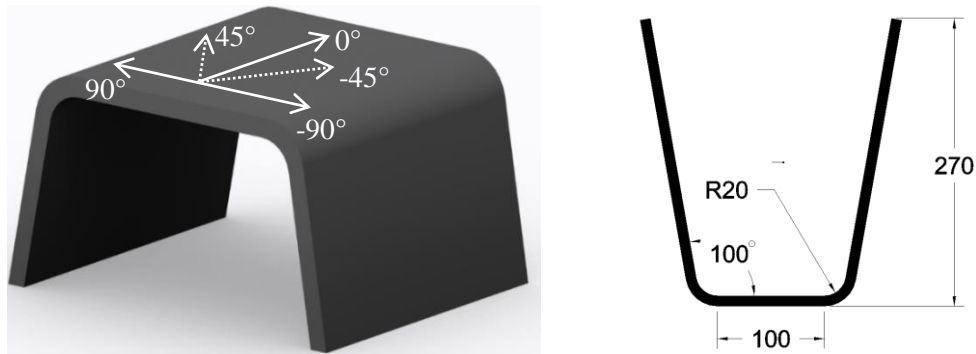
Fibre orientation on laminates (left), Cross section of aluminium mould with 20 mm corner radius (right)
